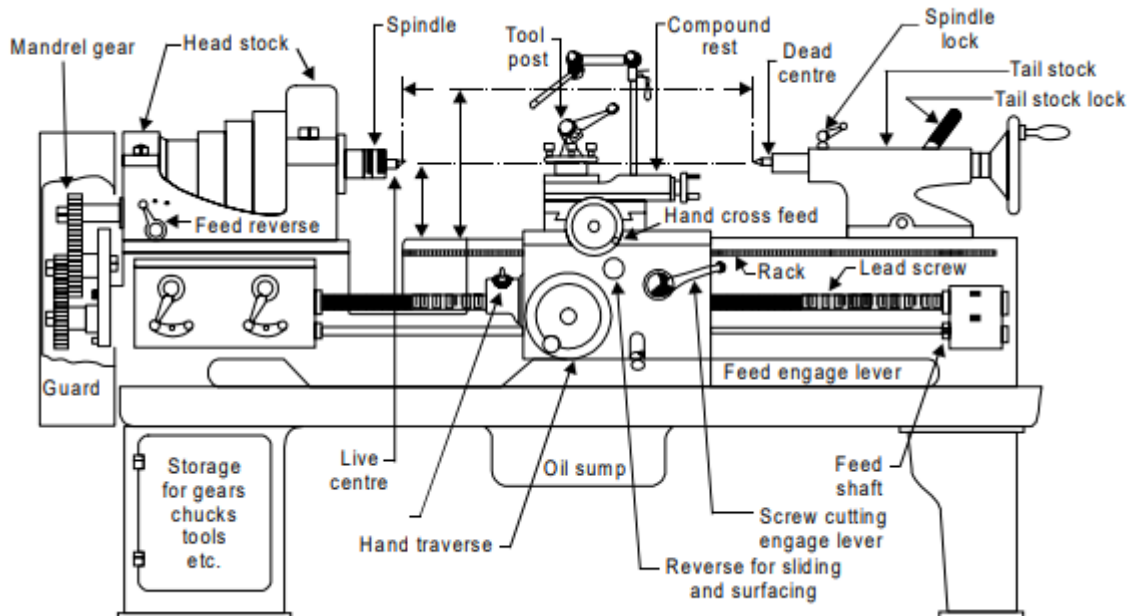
Shows different parts of engine lathe or central lathe (wordpress.com).
